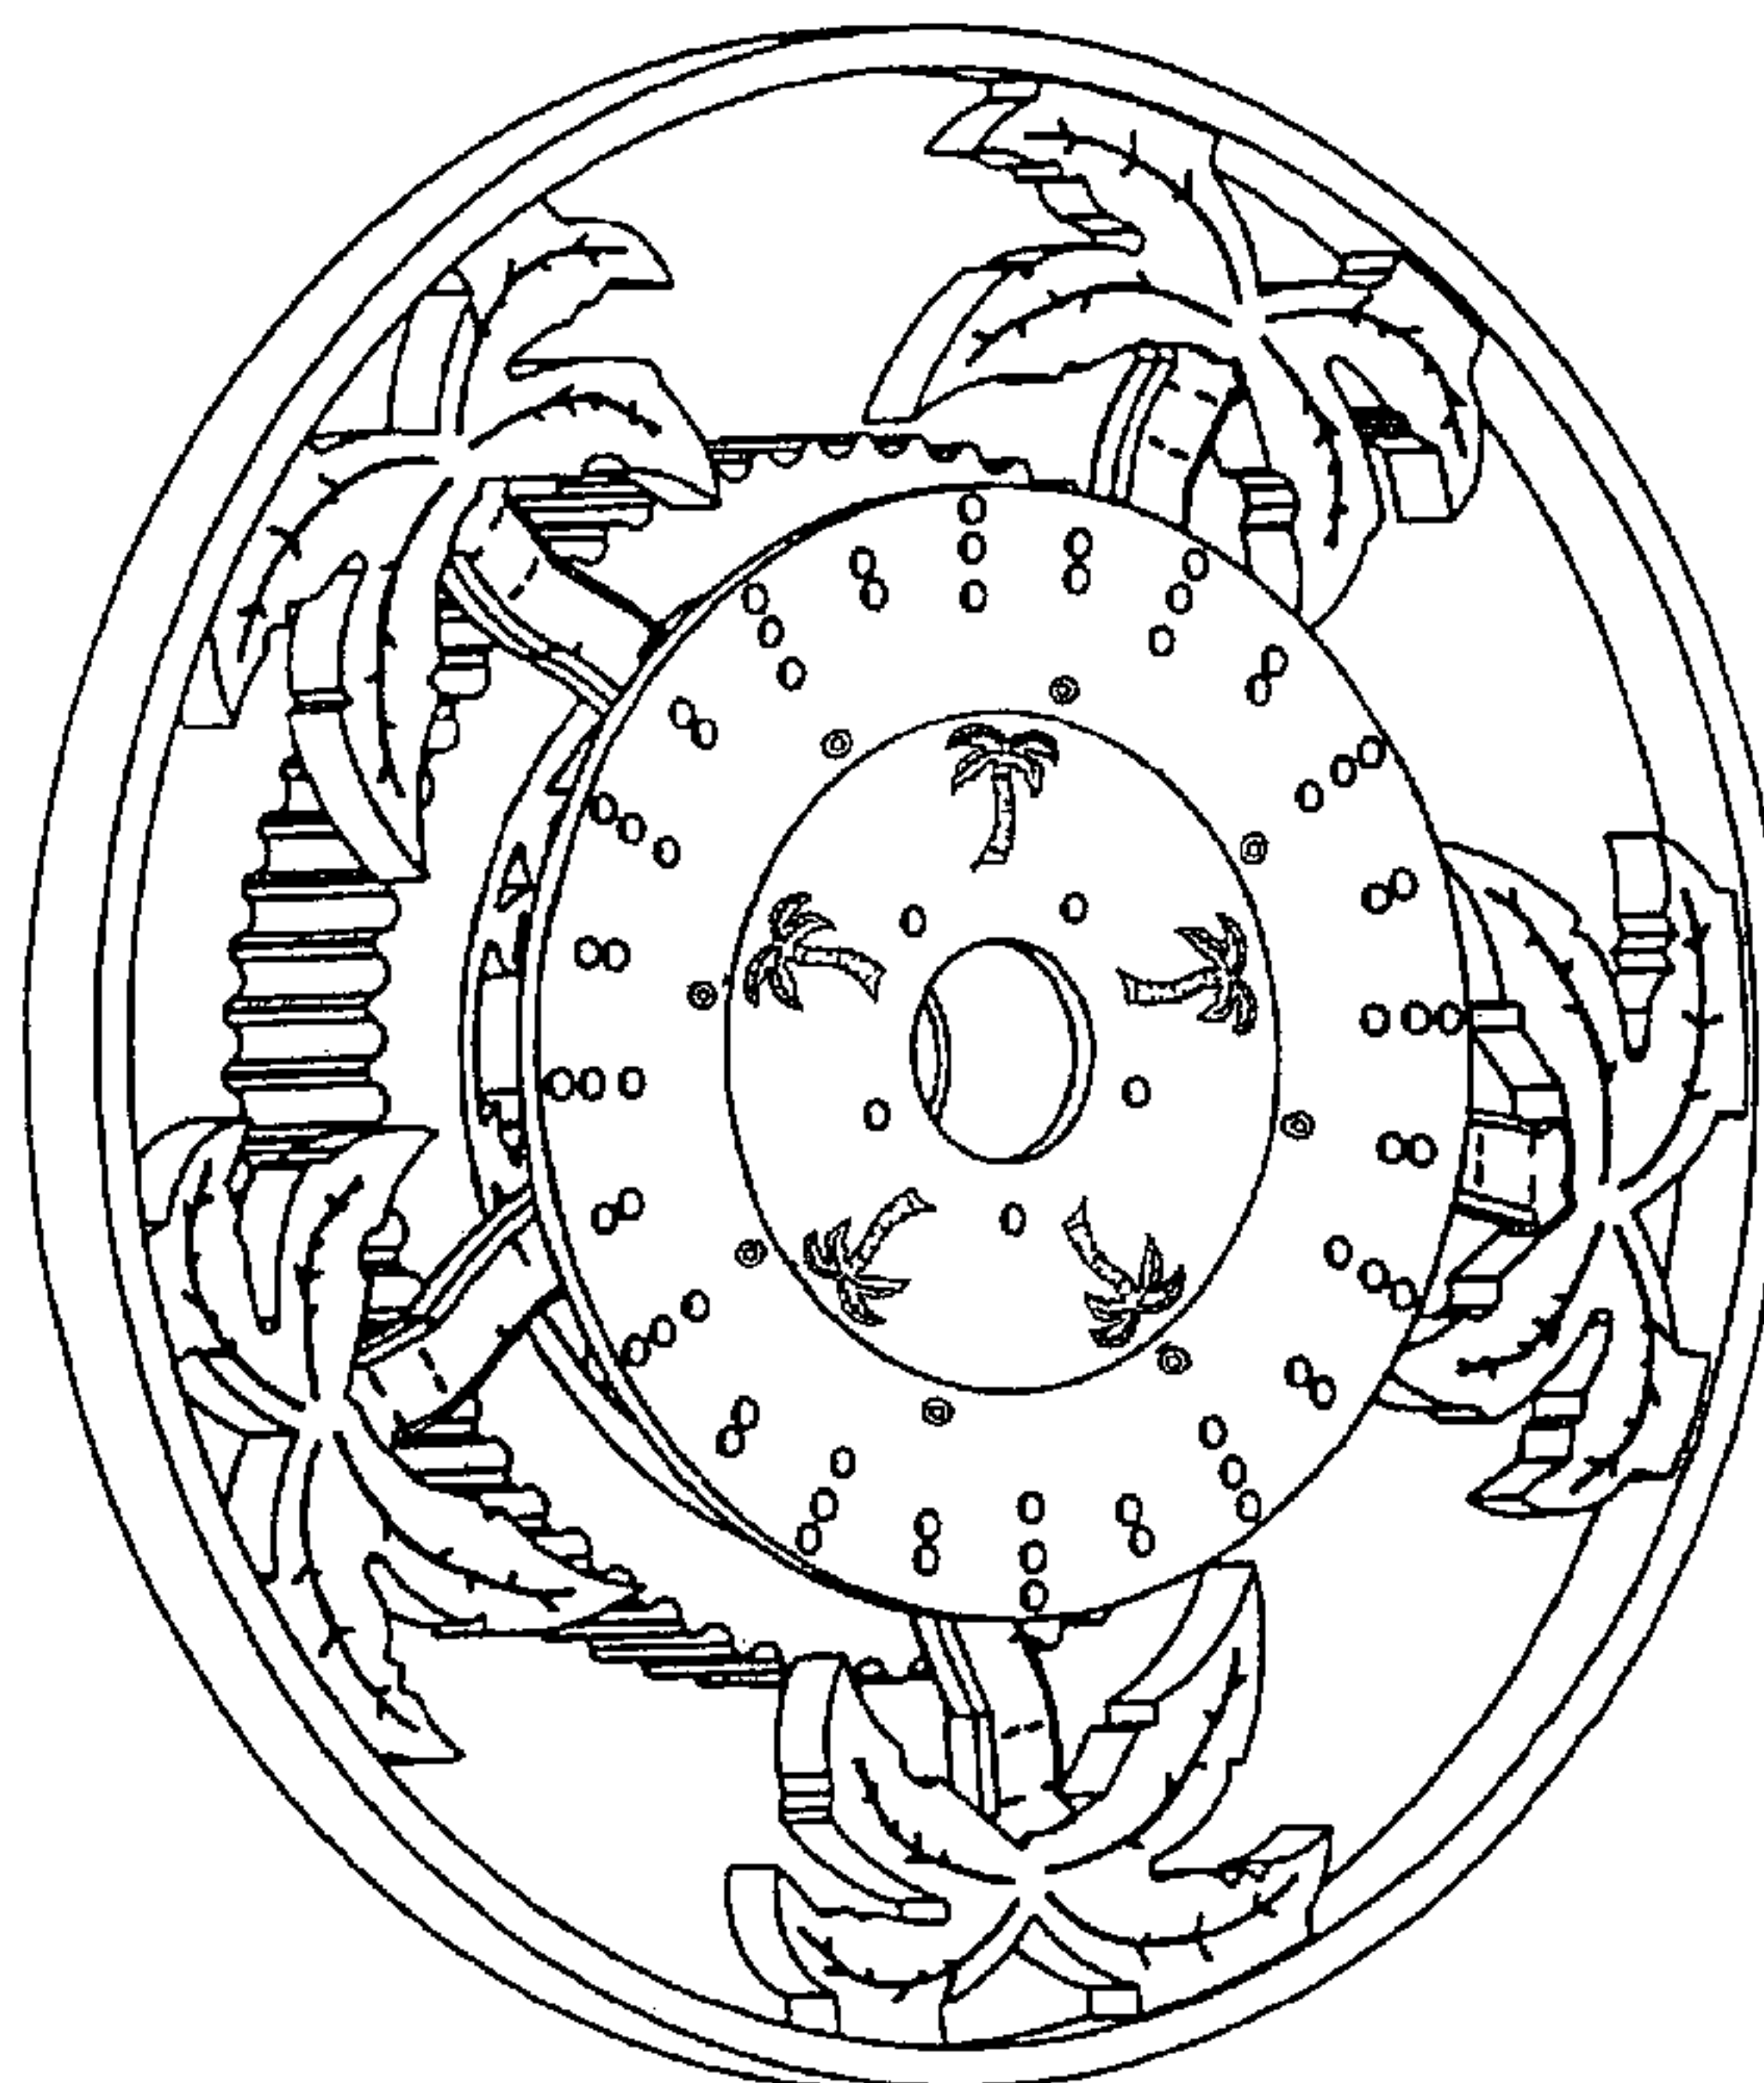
is a head on view of the brake disc of the motorcycle wheel of FIG. 1.
